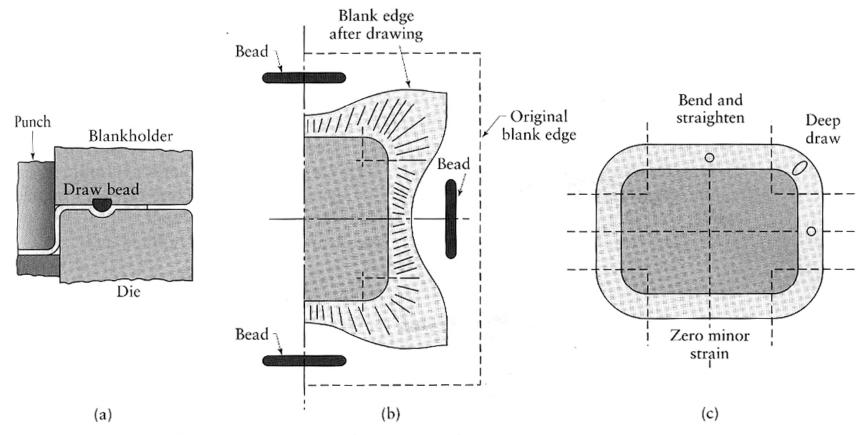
(a) Schematic illustration of a draw bead. (b) Metal flow during drawing of a box-shaped part, using beads to control the movement of the material. (c) Deformation of circular grids in drawing. (See Section 7.13.) *Source*: After S. Keeler.
